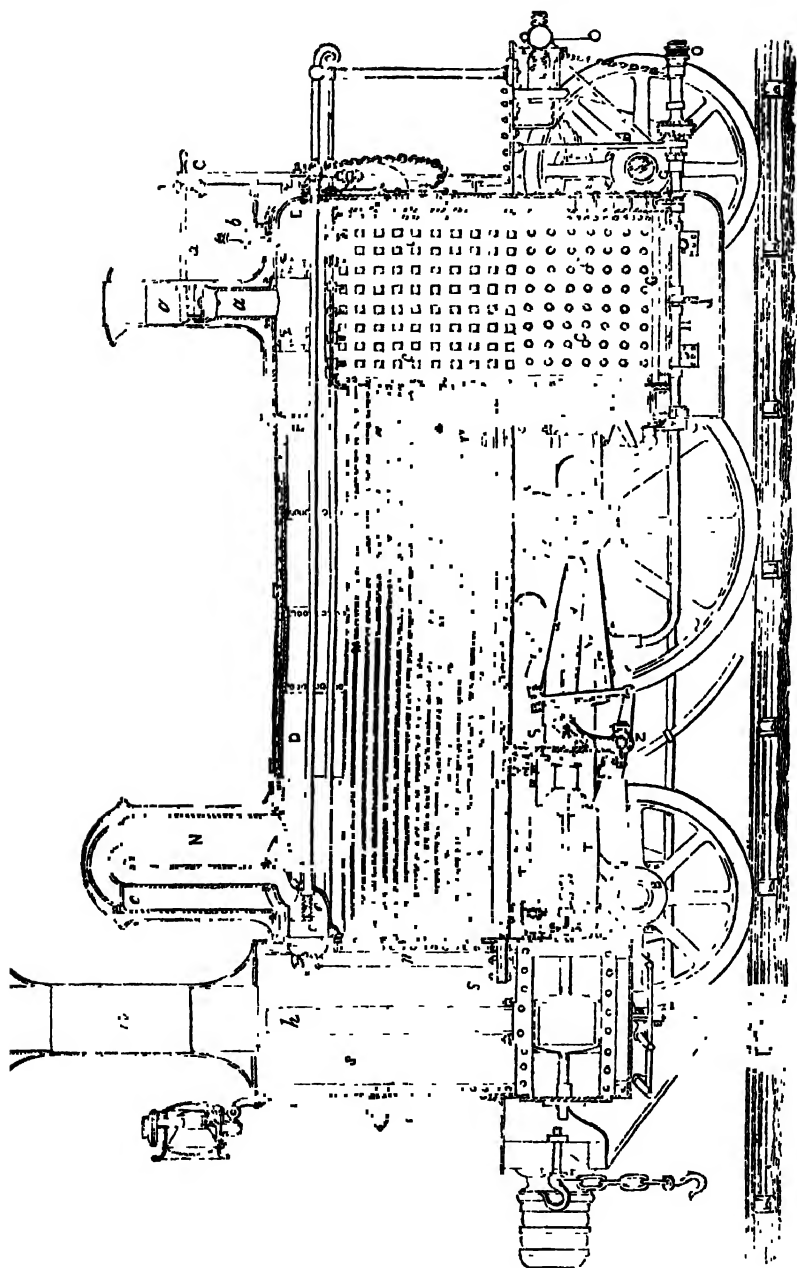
LONGITUDINAL SECTION OF FAST PASSENGER ENGINE.
